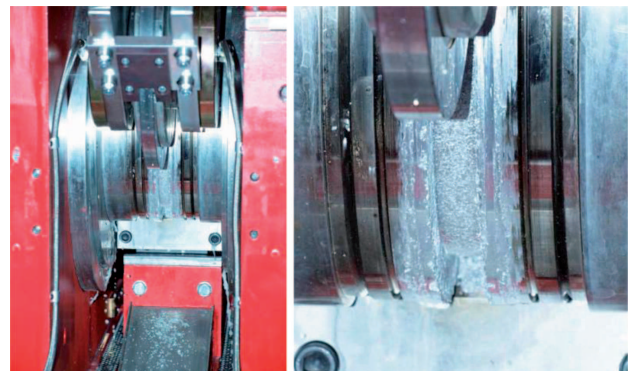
Clamping element for the pre-compaction of chips in the groove of the extrusion wheel
